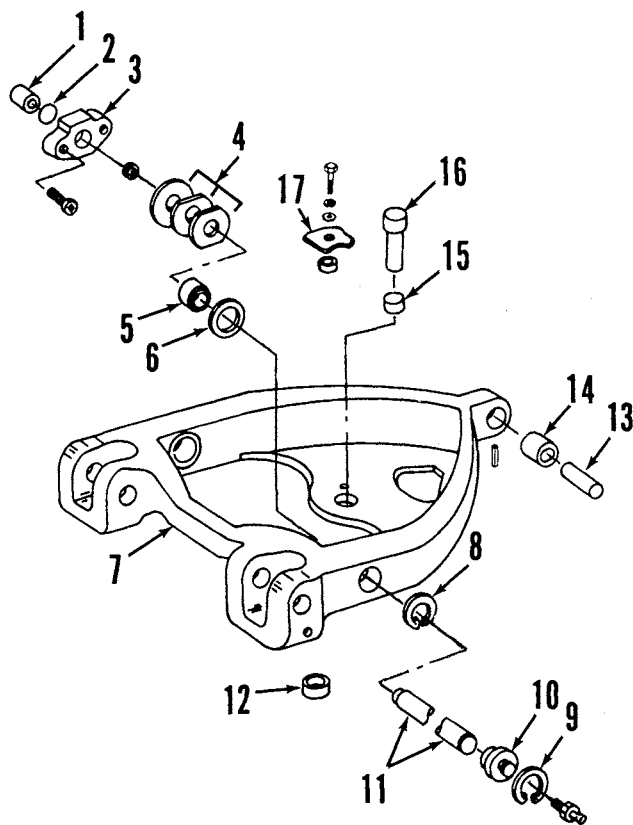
Exploded view of draft link and drawbar support used on Models 4050, 4250 and 4450.
